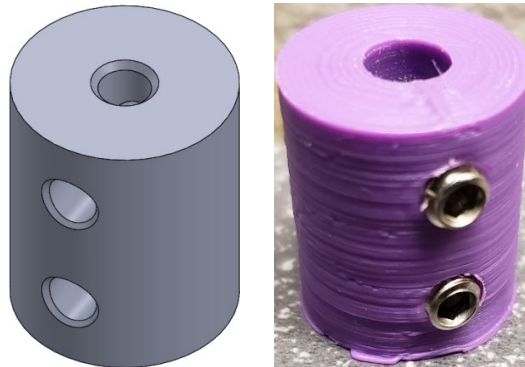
Standard version 1 drilled out shaft coupler. This part was printed with the flat surface on the print bed, 2 shells for the threads, and no supports. This part is approximately 0.8” tall and 0.6” in diameter.
